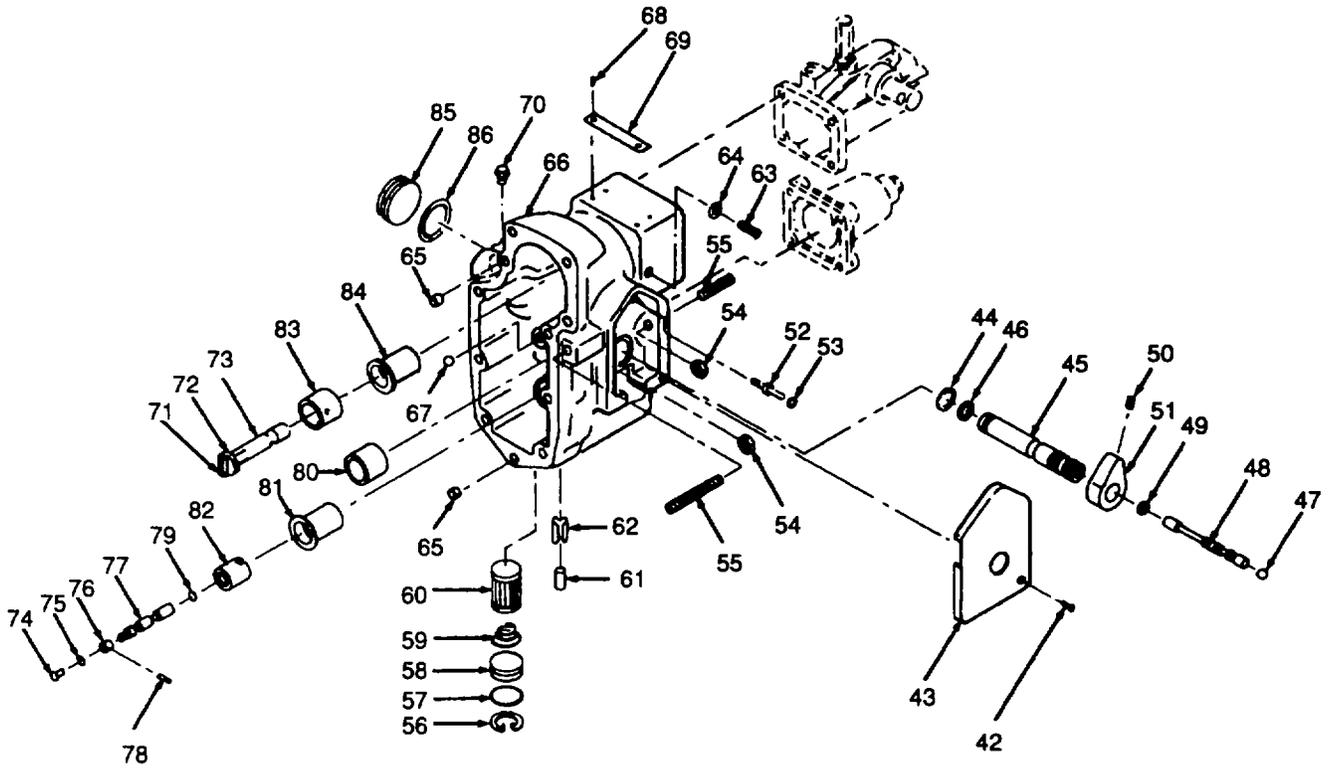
Fuel Injection Pump Housing and Related Parts, Exploded View (Sheet 1 of 3)
